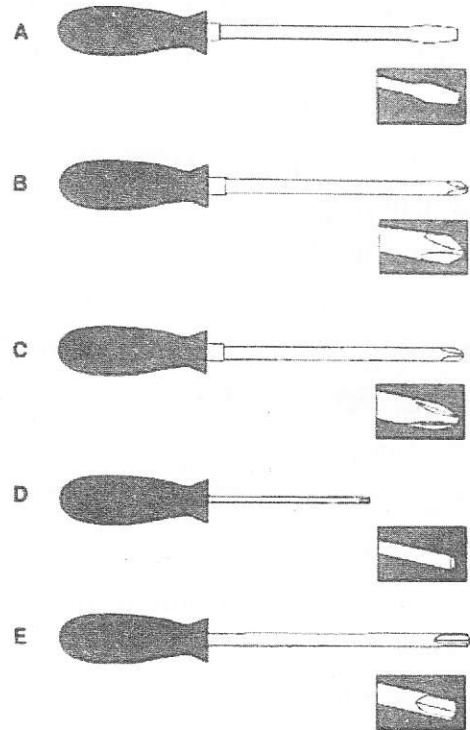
Screwdrivers types. A- standard; B-Phillips; C-Reed and Prince; D-Torx; E-Clutch-Head
